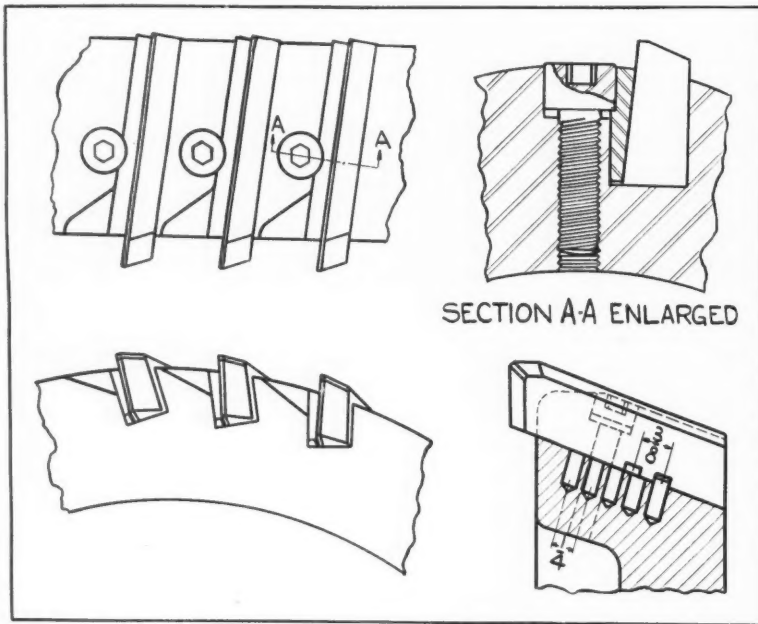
Method of Holding the Blades of "Positive-Lock" Face Milling Cutters
